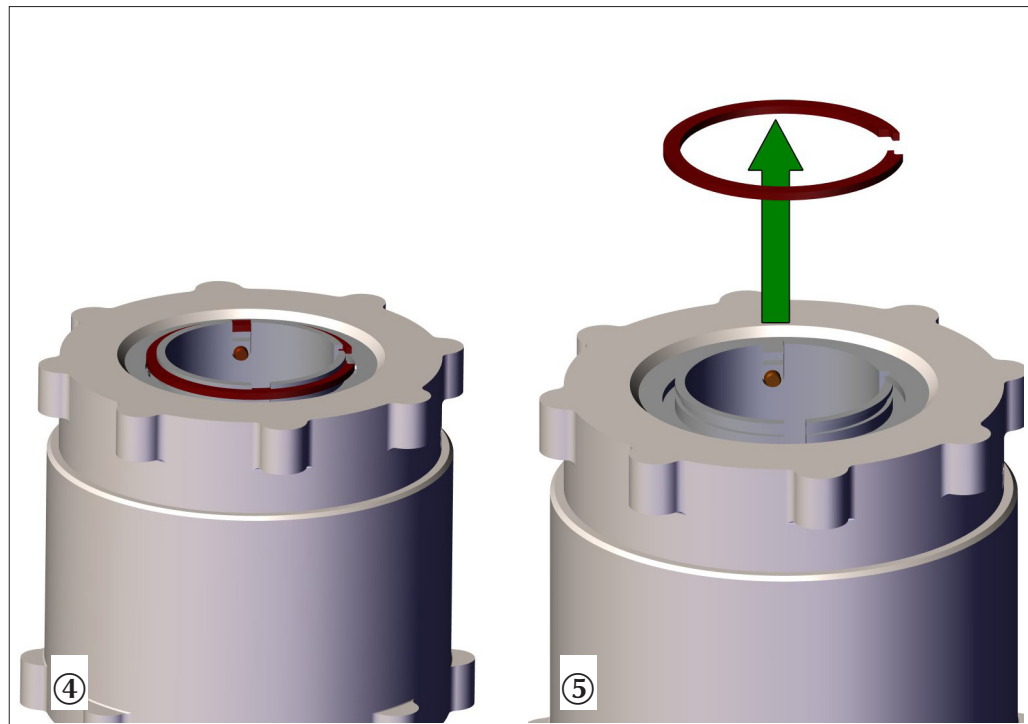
continued: Using the assembly aid to dismantle a mechanical seal cartridge
